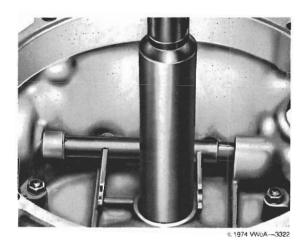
A sleeve-type bushing driver in place over the oil seal. Use a mallet to drive the seal in until it flush with the clutch housing.
